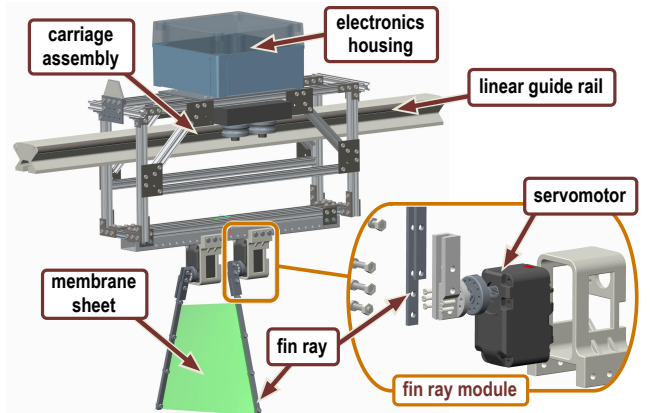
CAD drawing of the experimental two-ray fin prototype.
